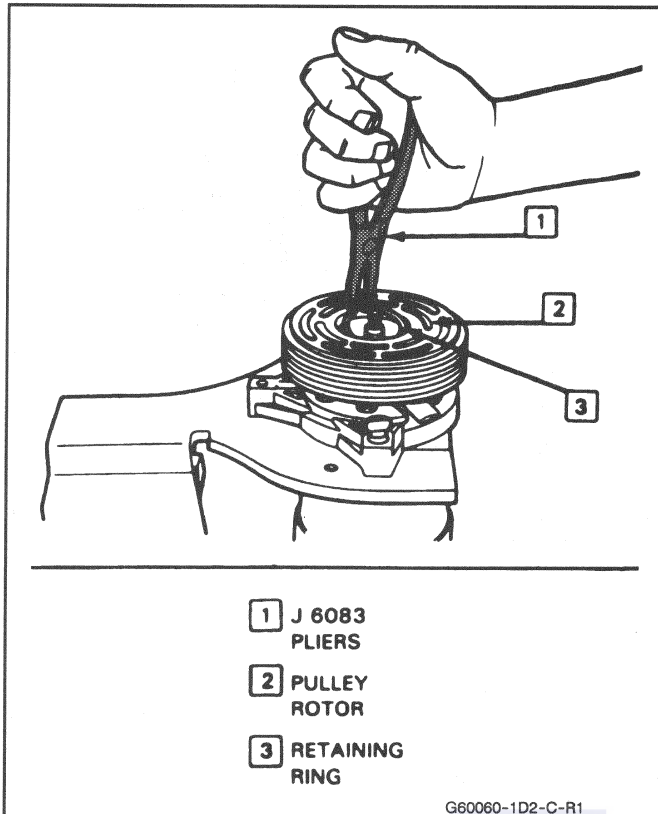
Installing-Removing Pulley Rotor & Bearing Assembly Retaining Ring
